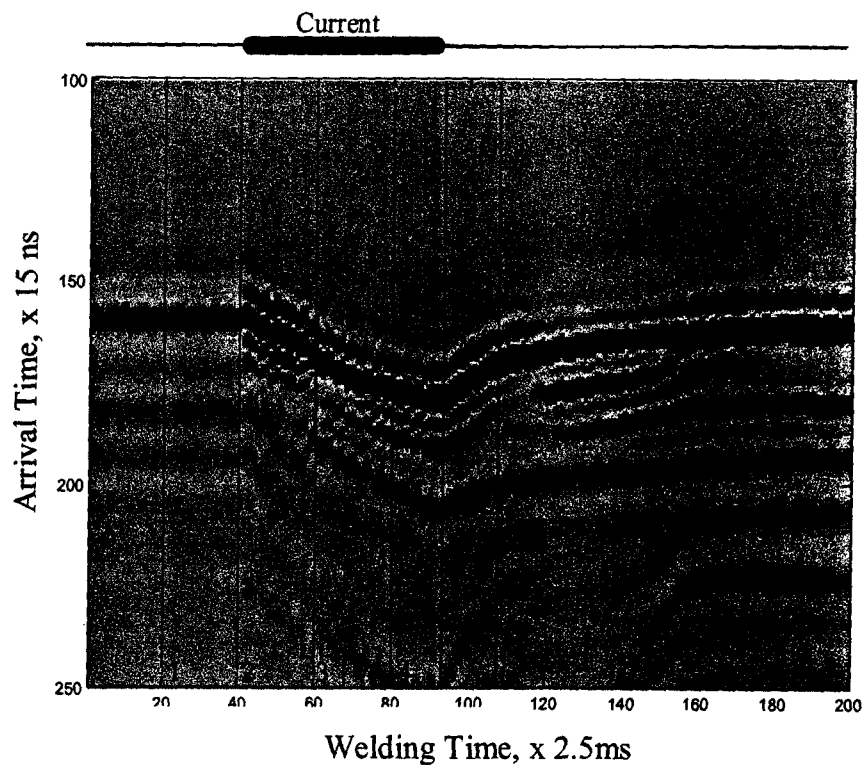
Signature (or B-scan) of the weld – the set of 200 waveforms put together. They cover the time period from before the welding, welding itself and cooling (solidification) of the new weld.
